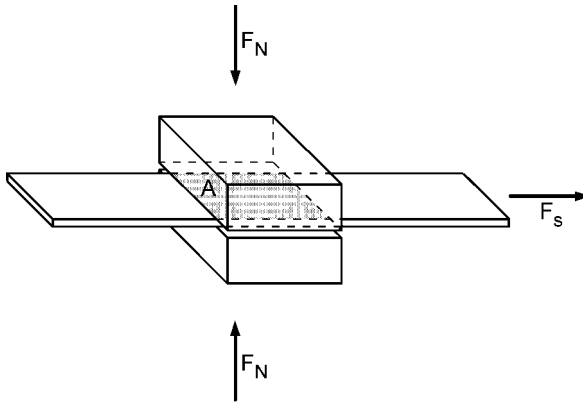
Strip drawing tester to assess lubricants. F_n = normal force; F_s = strip drawing force; A = stressed surface.
